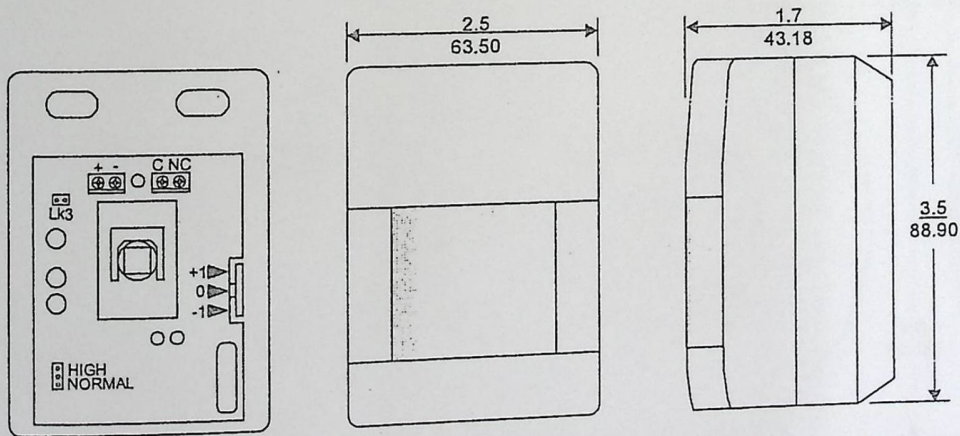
MRC19-PIRW Wiring Connections and Dimensions, in. (mm)
